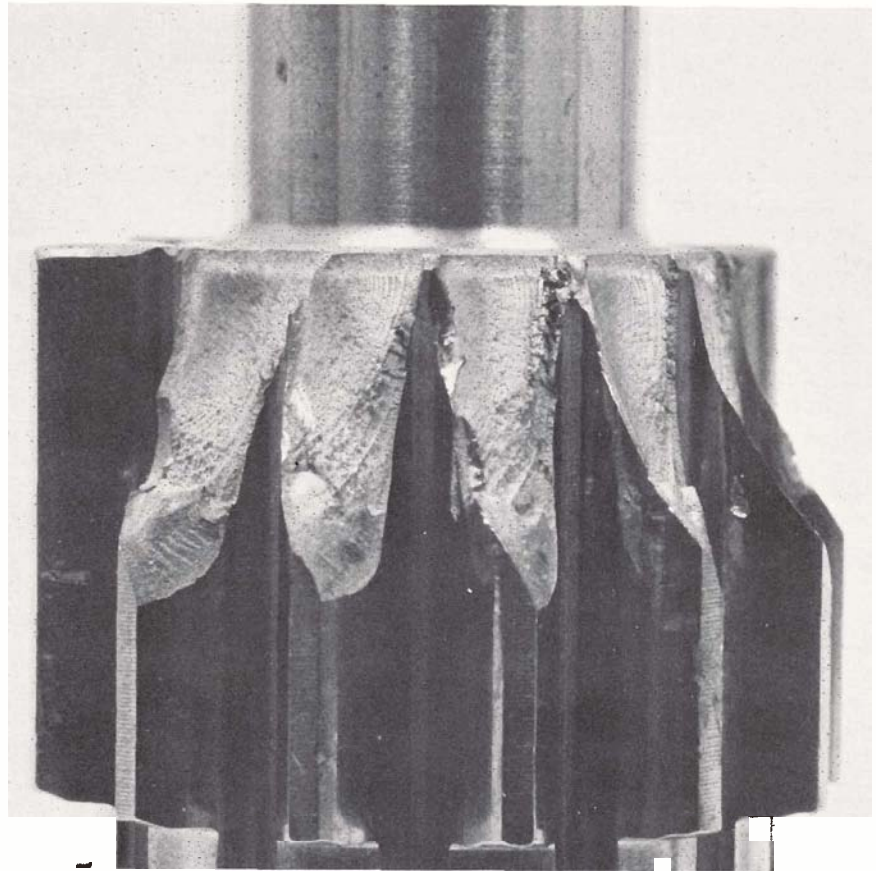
Engine starter gear teeth which failed because of misalignment. The steps across the fractured metal surface are fatigue striations.
